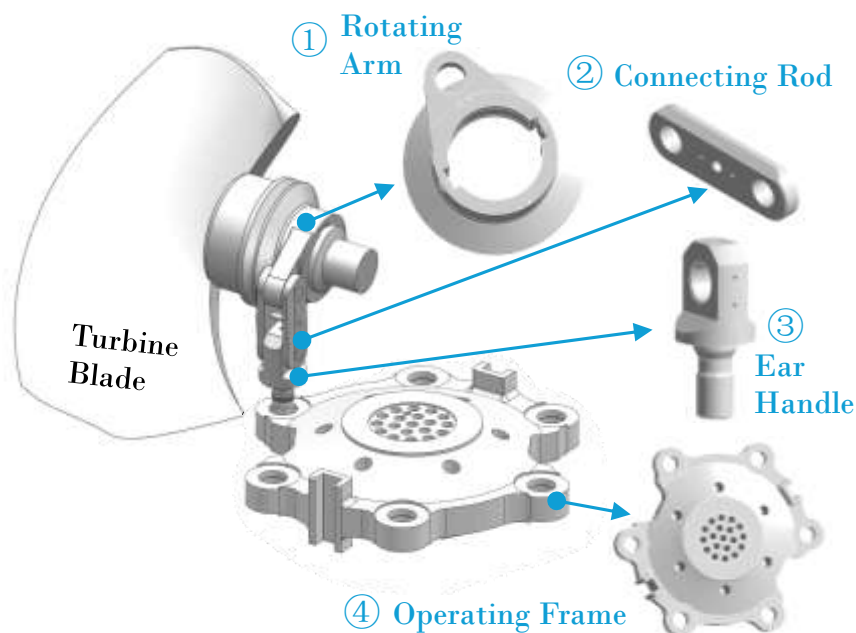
Runner blade angle adjustment mechanism of Kaplan turbine
